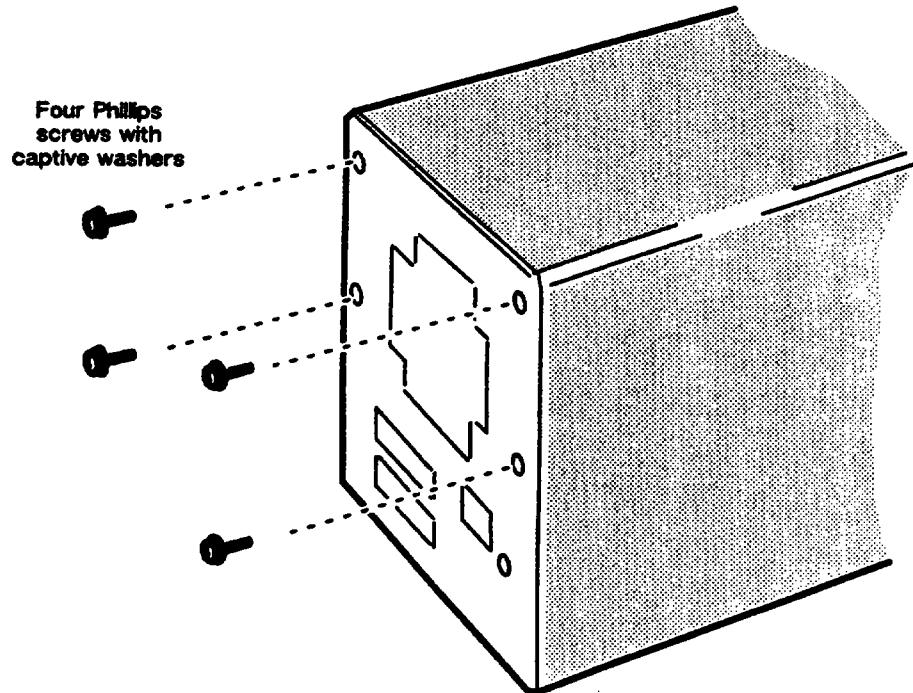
Attaching the Cover to the Base Housing Assembly
